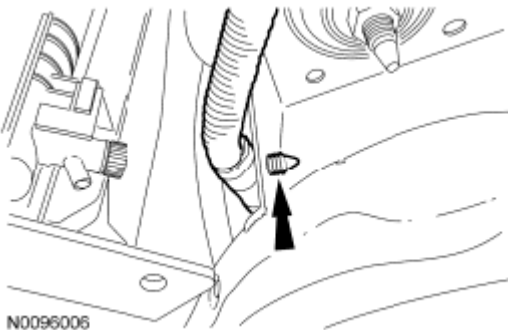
Locating EPAS System Wiring Harness Pin-Type Retainer
